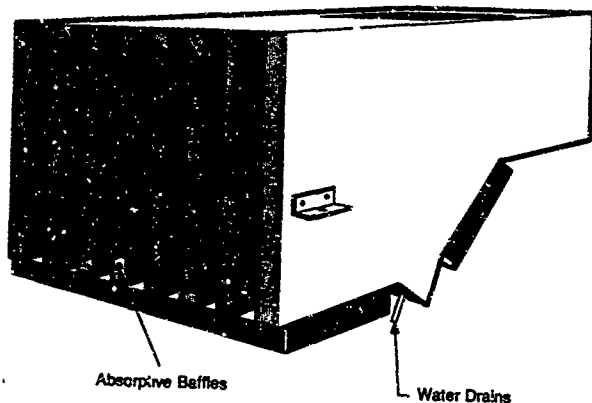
DRAWING OF THE PARALLEL BAFFLE SILENCER FOR THE AUXILIARY COOLING AIR INLET OPENING TO THE HOUSING.
